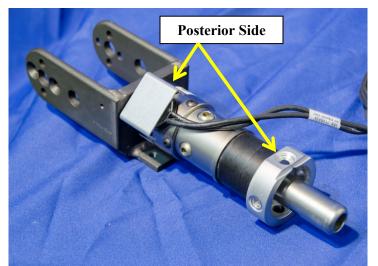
Connect lower tibia tube assembly to lower flange of tibia compliant bushing (posterior view)
